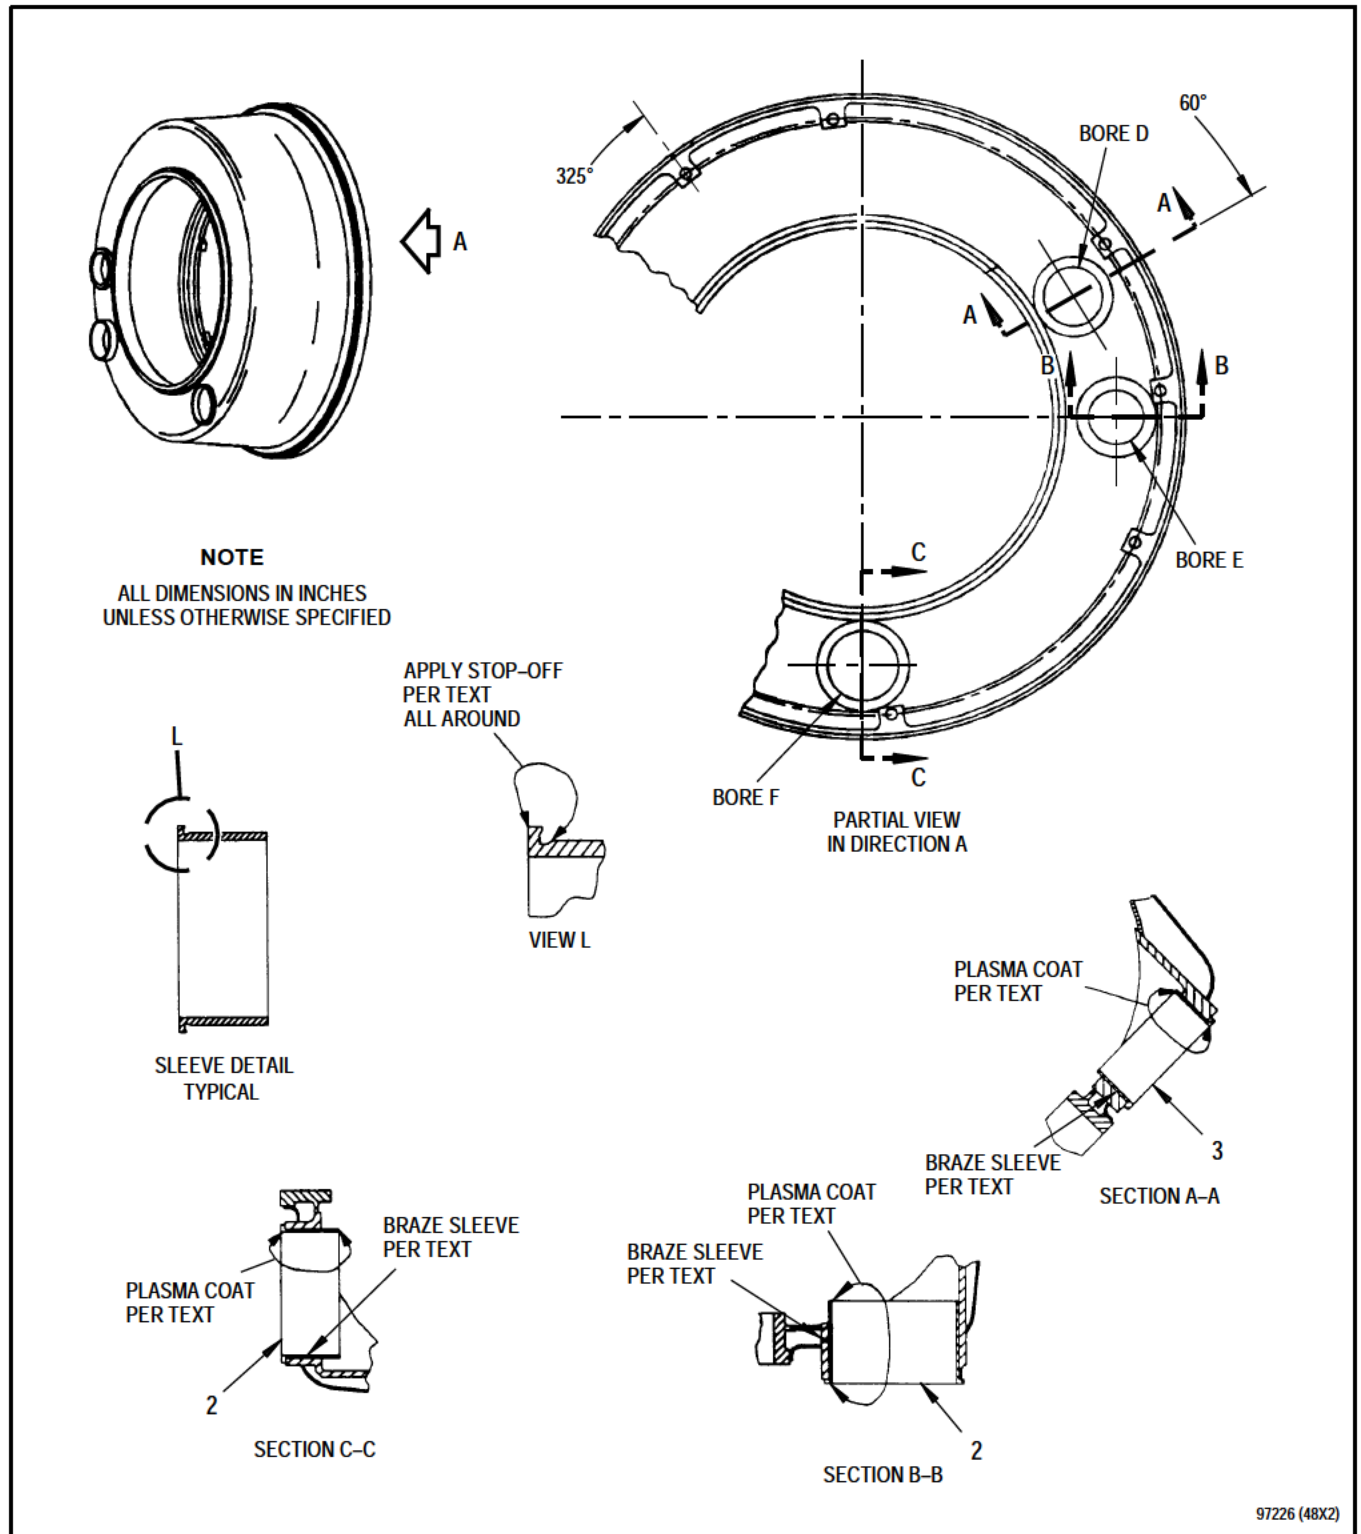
No. 4 Bearing Front Air Sealing Flange Metal Seal Ring Contact Surface - Sleeve Repair (Sleeve Installation and Plasma Spray)
